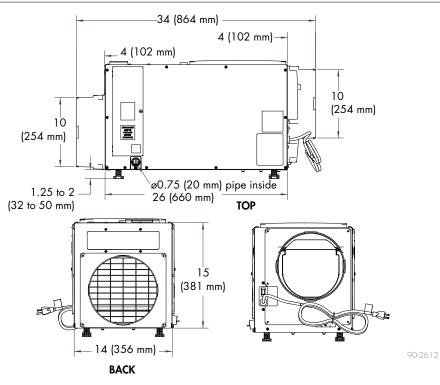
MODEL RL-3 DEHUMIDIFIER DIMENSIONS
